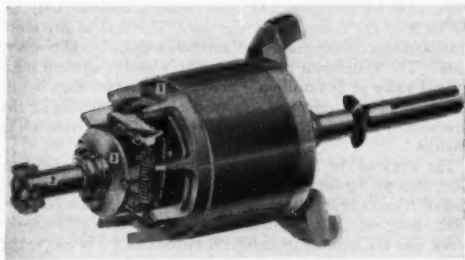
VIEW OF FORM G ROTOR ASSEMBLY
